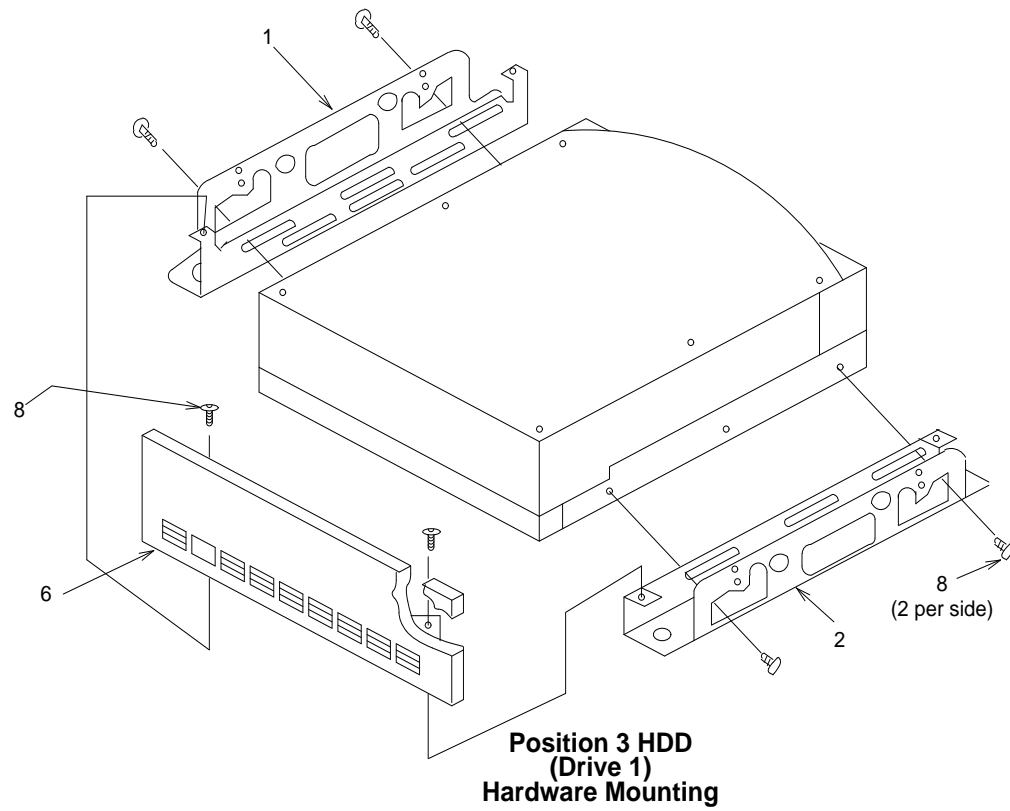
Position 3 Hard Disk Drive Mounting Kit
